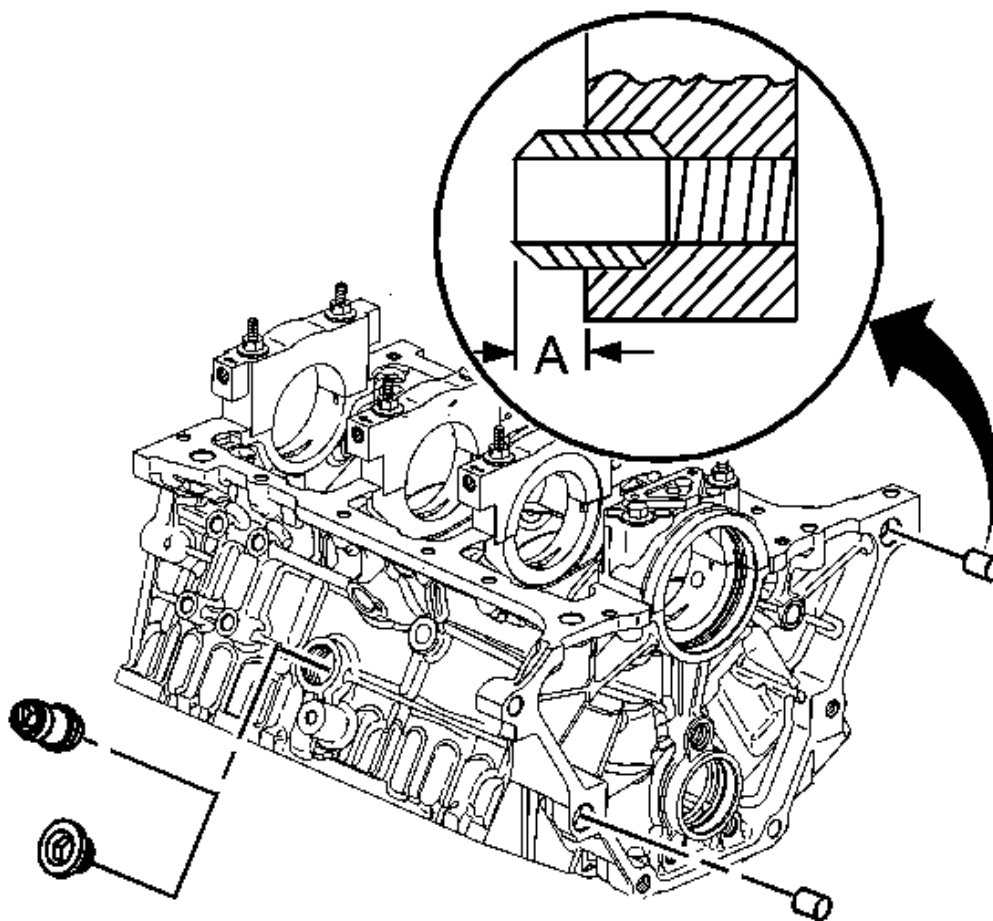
View Of Engine Block Plug, Engine Block Heater & Transmission Locating Pins
